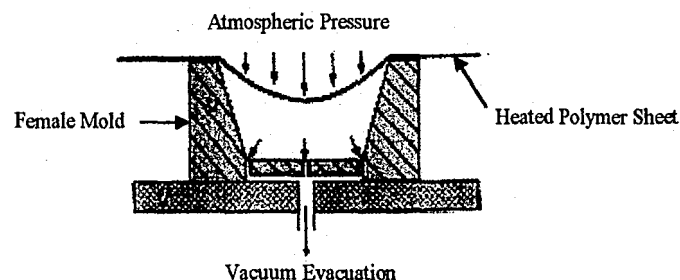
2 : The vacuum-forming process of a heated polymer sheet into a female mold.
